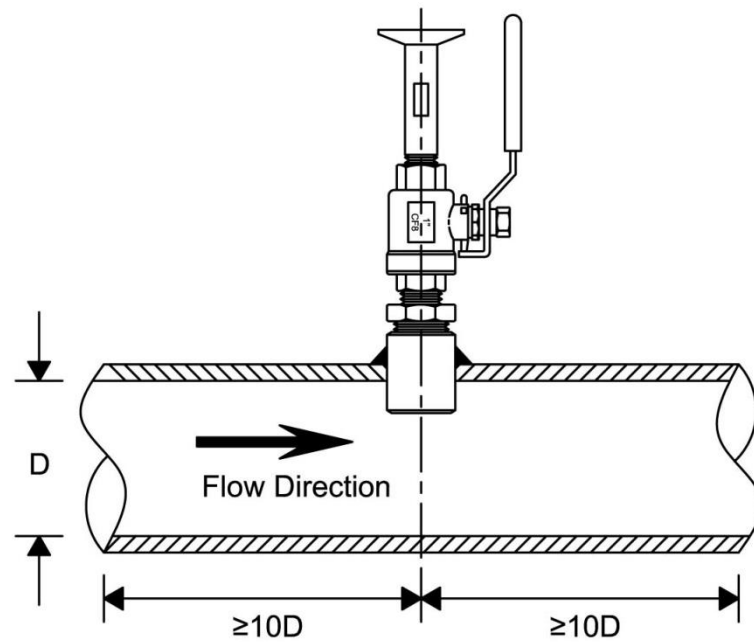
Installation of welding socket on pipeline (Wrong method)
